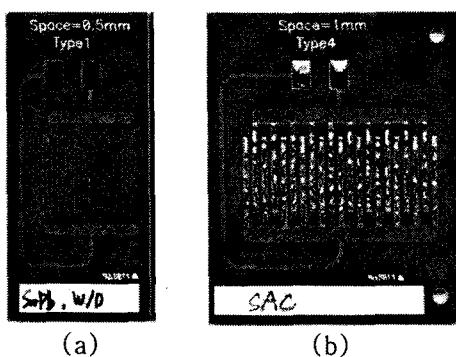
Photographs of comb pattern PCB for ion migration test : (a) Sn37-Pb, (b) Sn-3.0Ag-0.5Cu.
